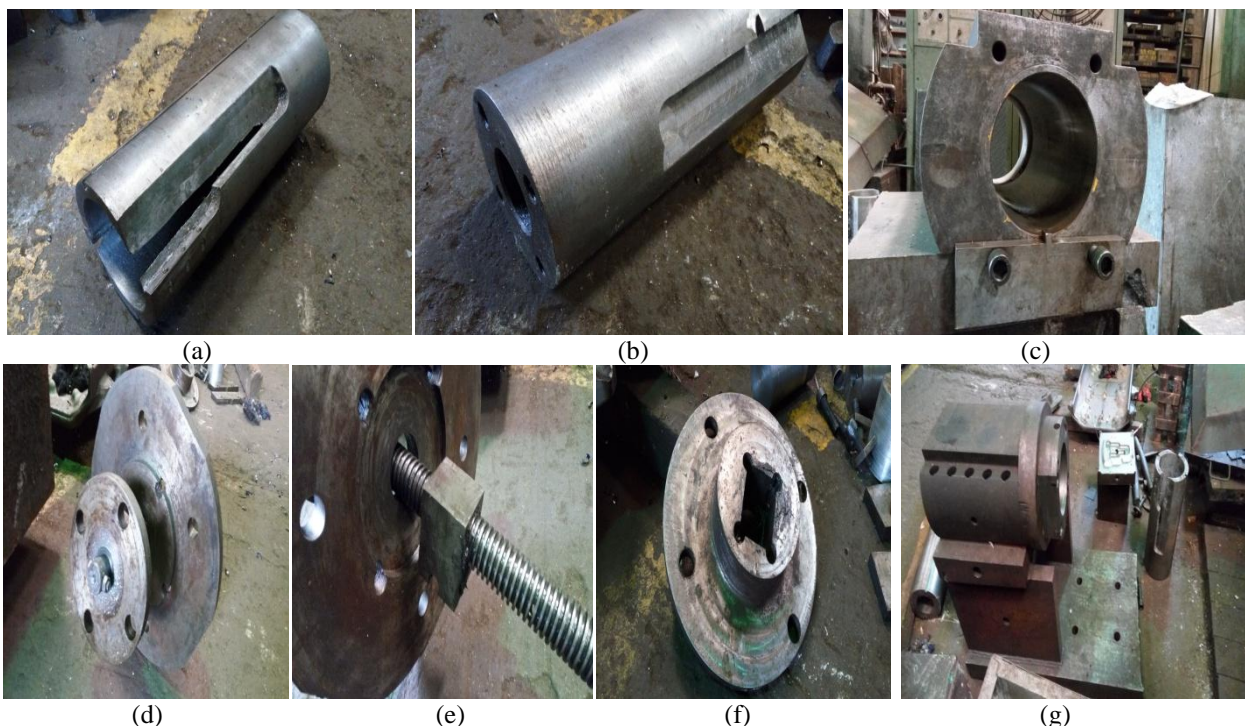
(a) Trepanning tool (b) Rear portion of trepanning tool (c) Holding plate fixed on the main cover (d) Rear plate of trepanning tool with pin arrangement of spindle (e) Spindle and square piece arrangement (f) Flange with square hole (g) Main cover fixed on the top fix
